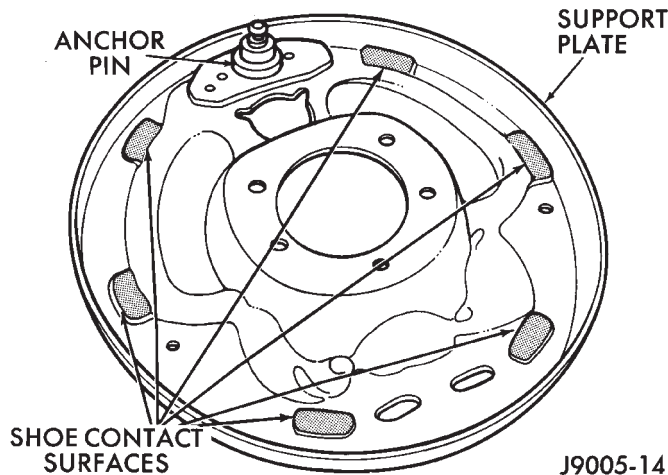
Shoe Contact Surfaces (9-Inch Support Plate)
